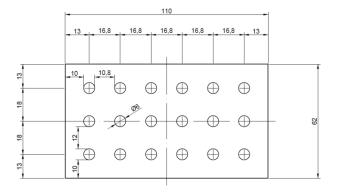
Distribution of the drilling holes on one surface of the workpiece
